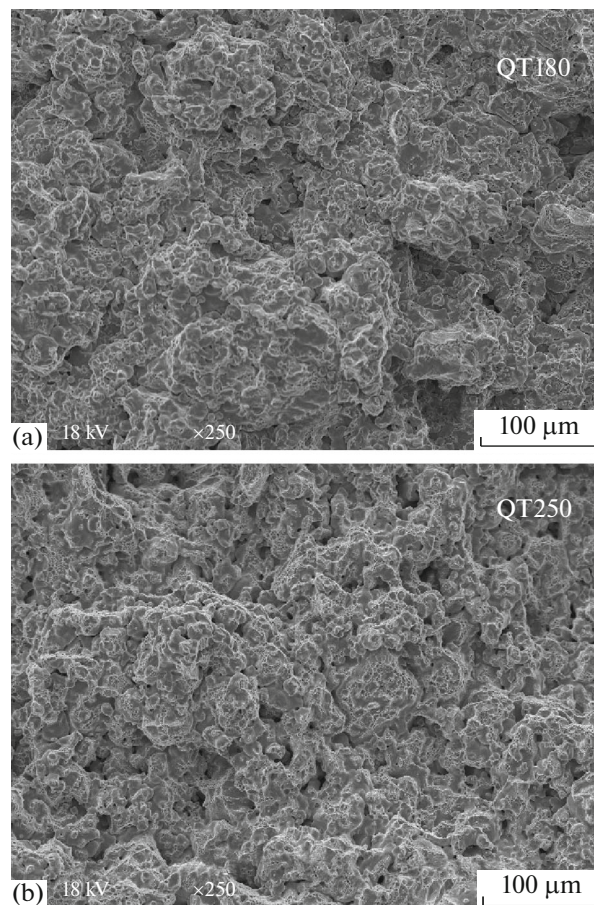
Fracture surface morphologies of quenched and tempered specimens; (a) QT180, (b) QT250.
